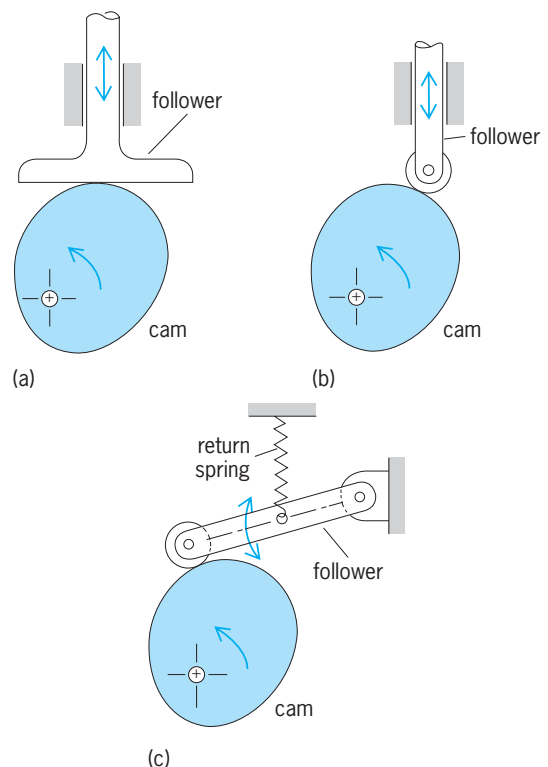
Cam-follower configurations. (a) Disk cam with flat-faced translating follower. (b) Disk cam with translating roller follower. (c) Disk cam with swinging roller follower.
